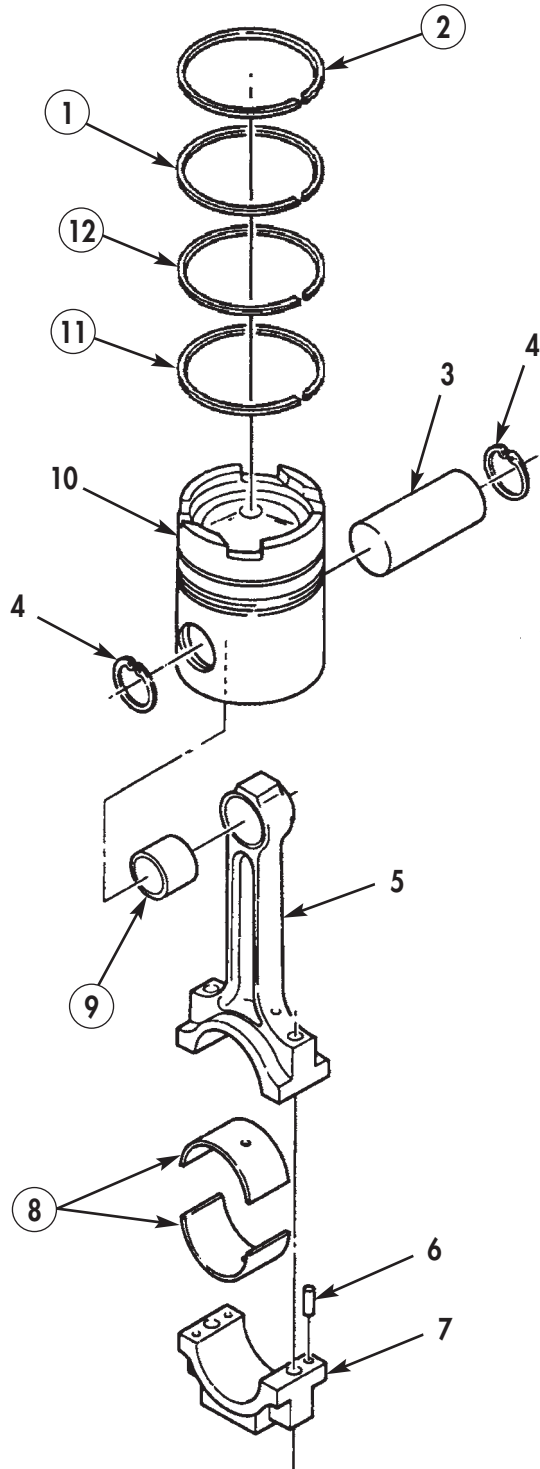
Piston, Connecting Rod, and Bearing Disassembly.
